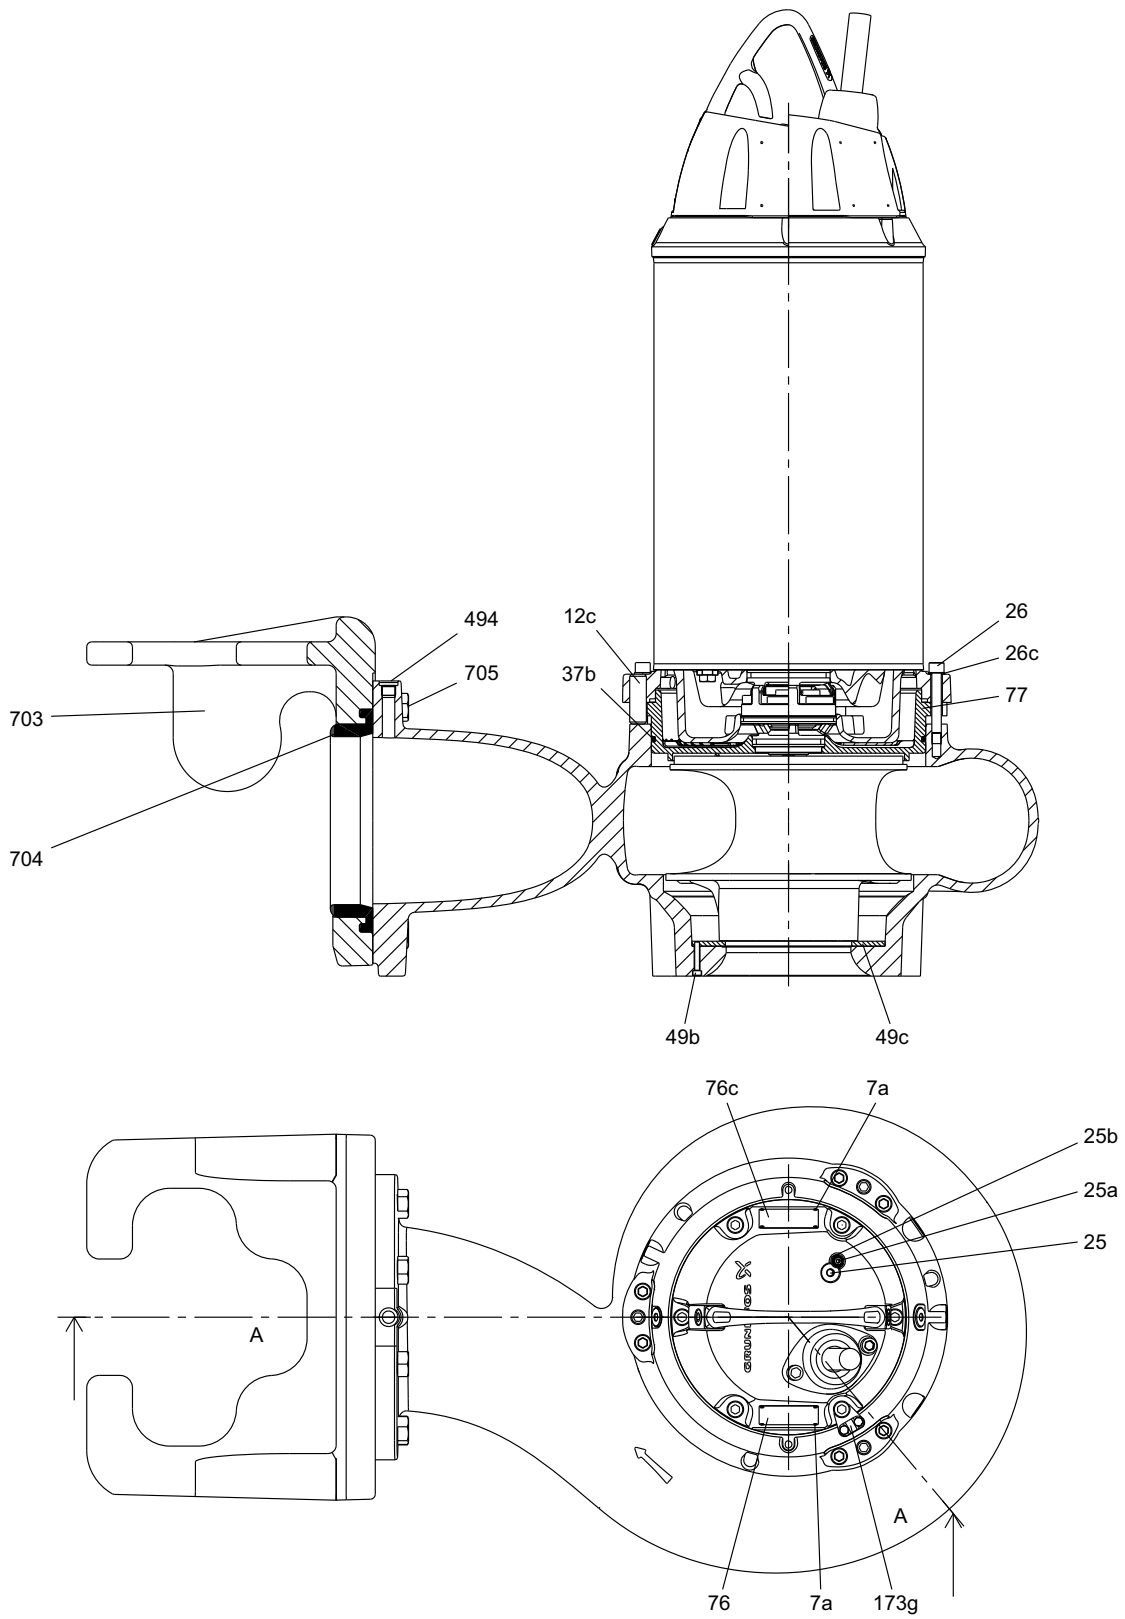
Sectional drawing, SE pump with guide claw, 2-4 poles
